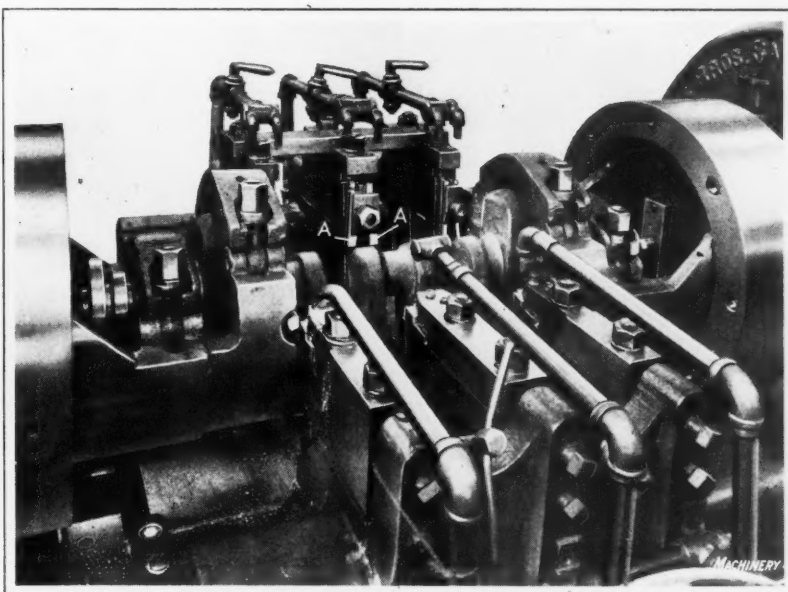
Tooling provided on Lathe for simultaneously rough-turning Three Bearings and rough-facing the Adjacent Crank Cheeks
